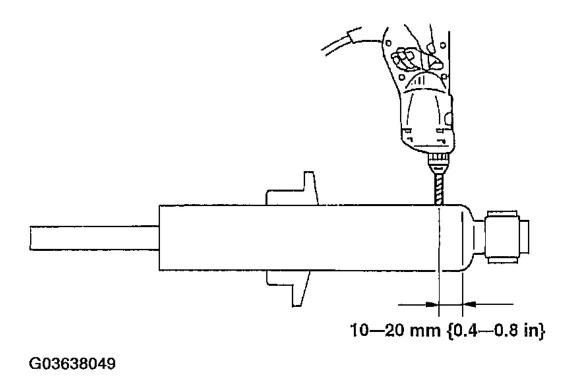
Drilling A Shock Absorber On A Flat Surface Or With Piston Pointing Courtesy of MAZDA MOTORS CORP.
